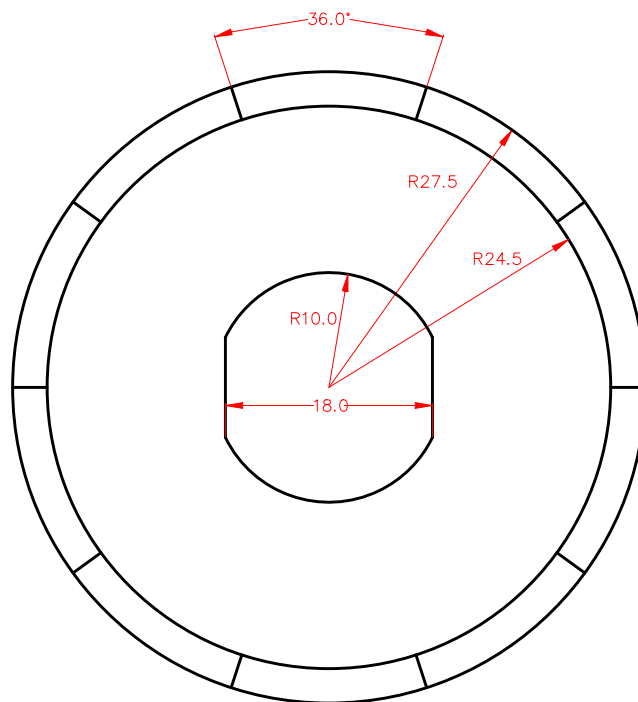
Dimensions of the 12-slot stator with closed slot openings for SPM machines.
